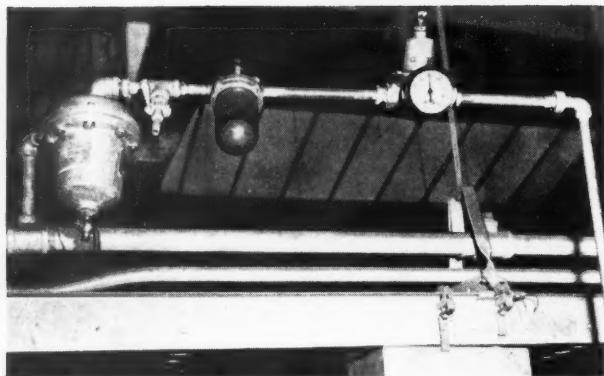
Clean, dry air for the operation of the pneumatic device is assured by the use of a filter, lubricator and regulator for each machine.
